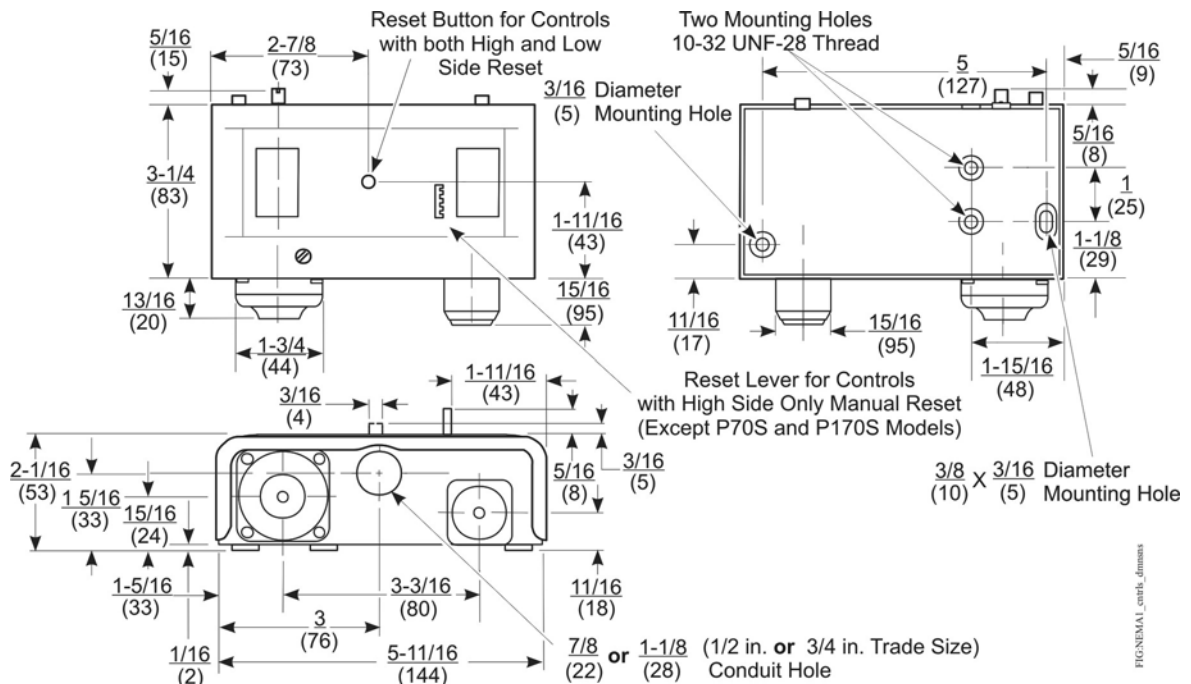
Dimensions for P70, P72, and P170 Dual Pressure Controls with NEMA 1 Enclosure, in. (mm)
